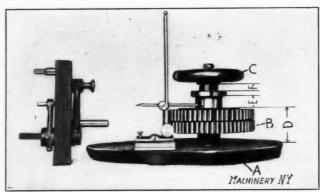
Special Devices used in Assembling the Lathe Apron shown in Fig. 3
